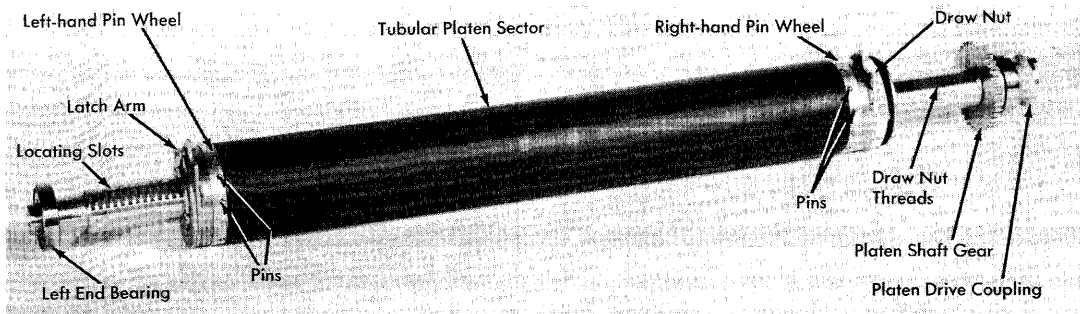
MODEL P-3 PIN-FEED PLATEN
